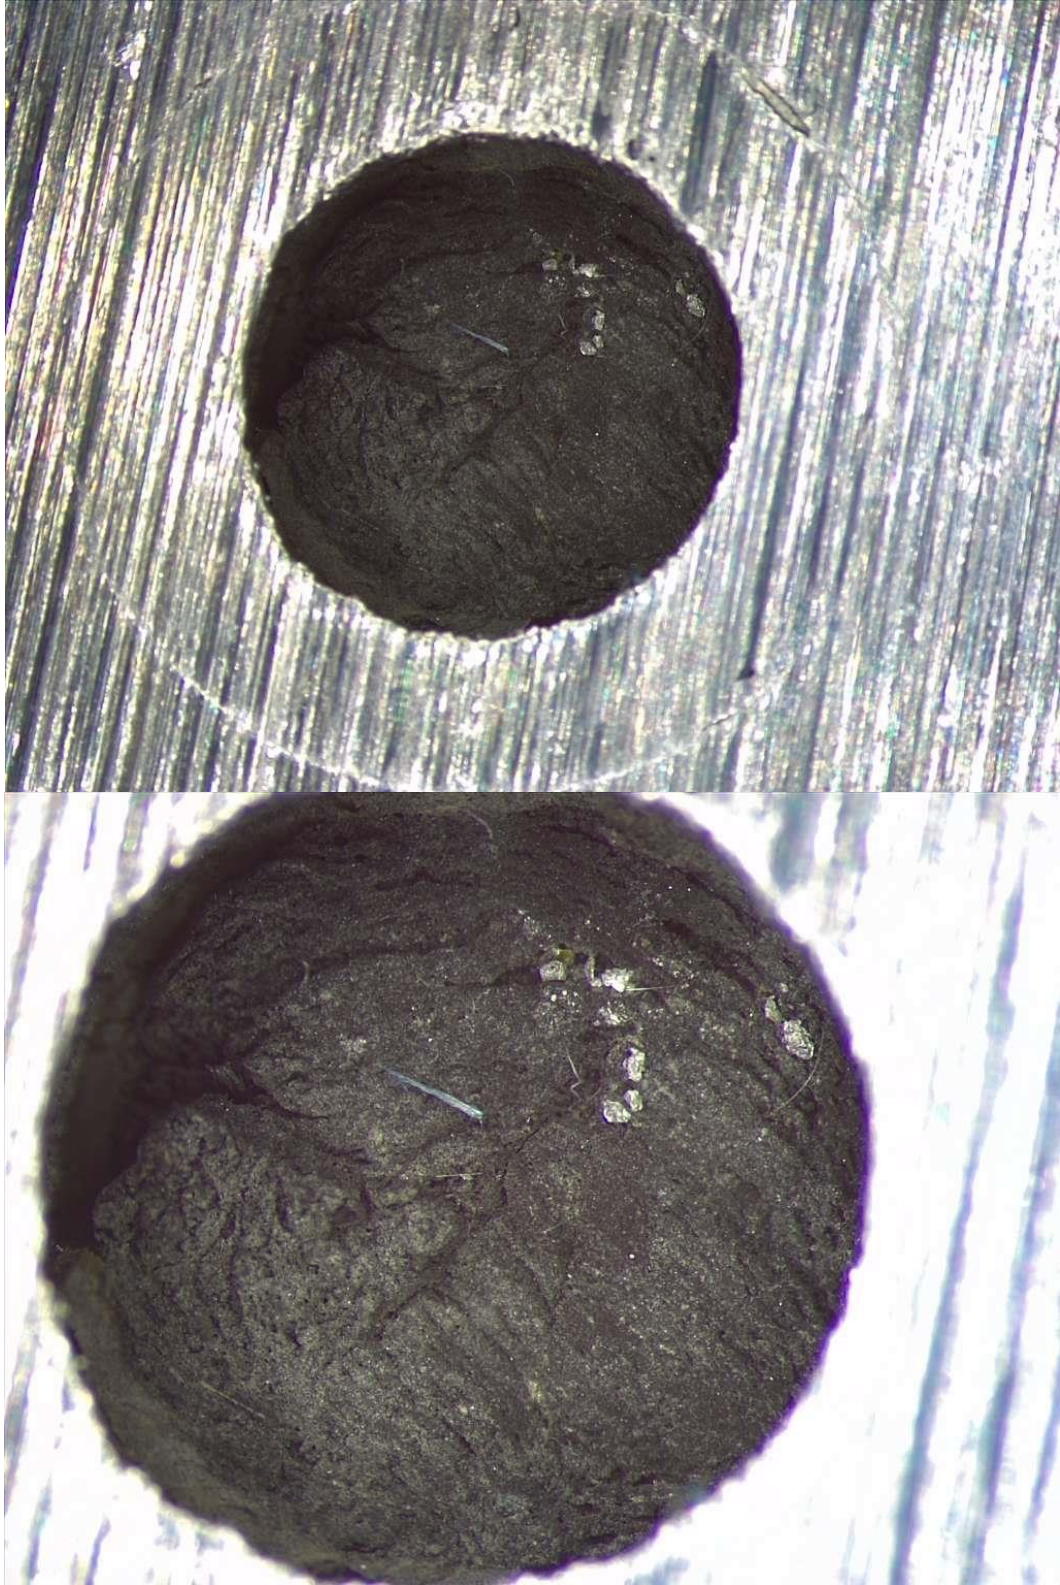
Microscopic Photos of Fracture Surface (2 of 2)
